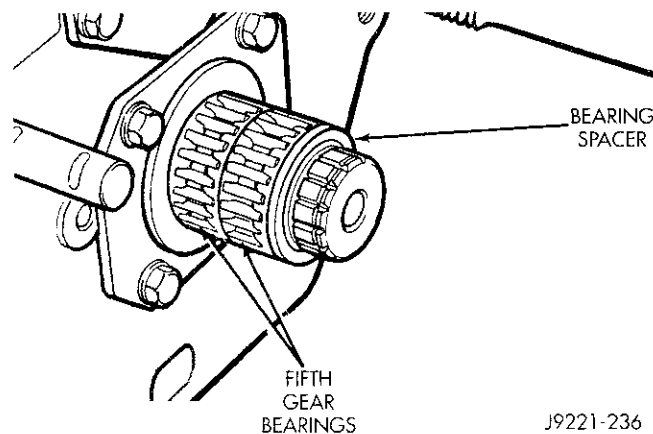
Countershaft Fifth Gear Bearing And Spacer Installation
